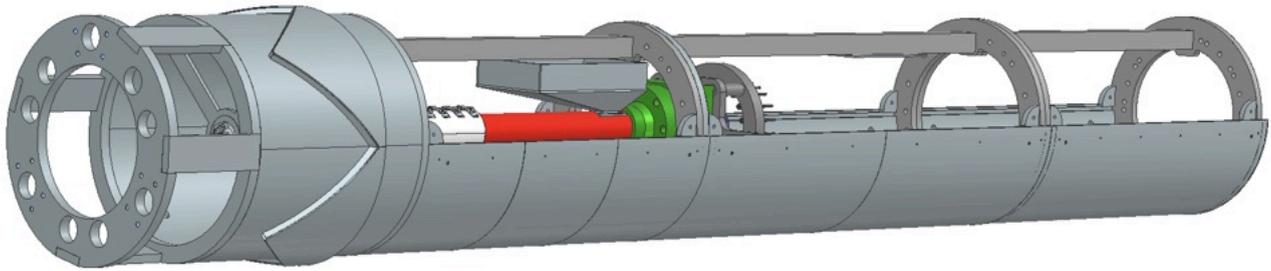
Swissloop Tunnelings Tunnel Lining System (Panels removed)
